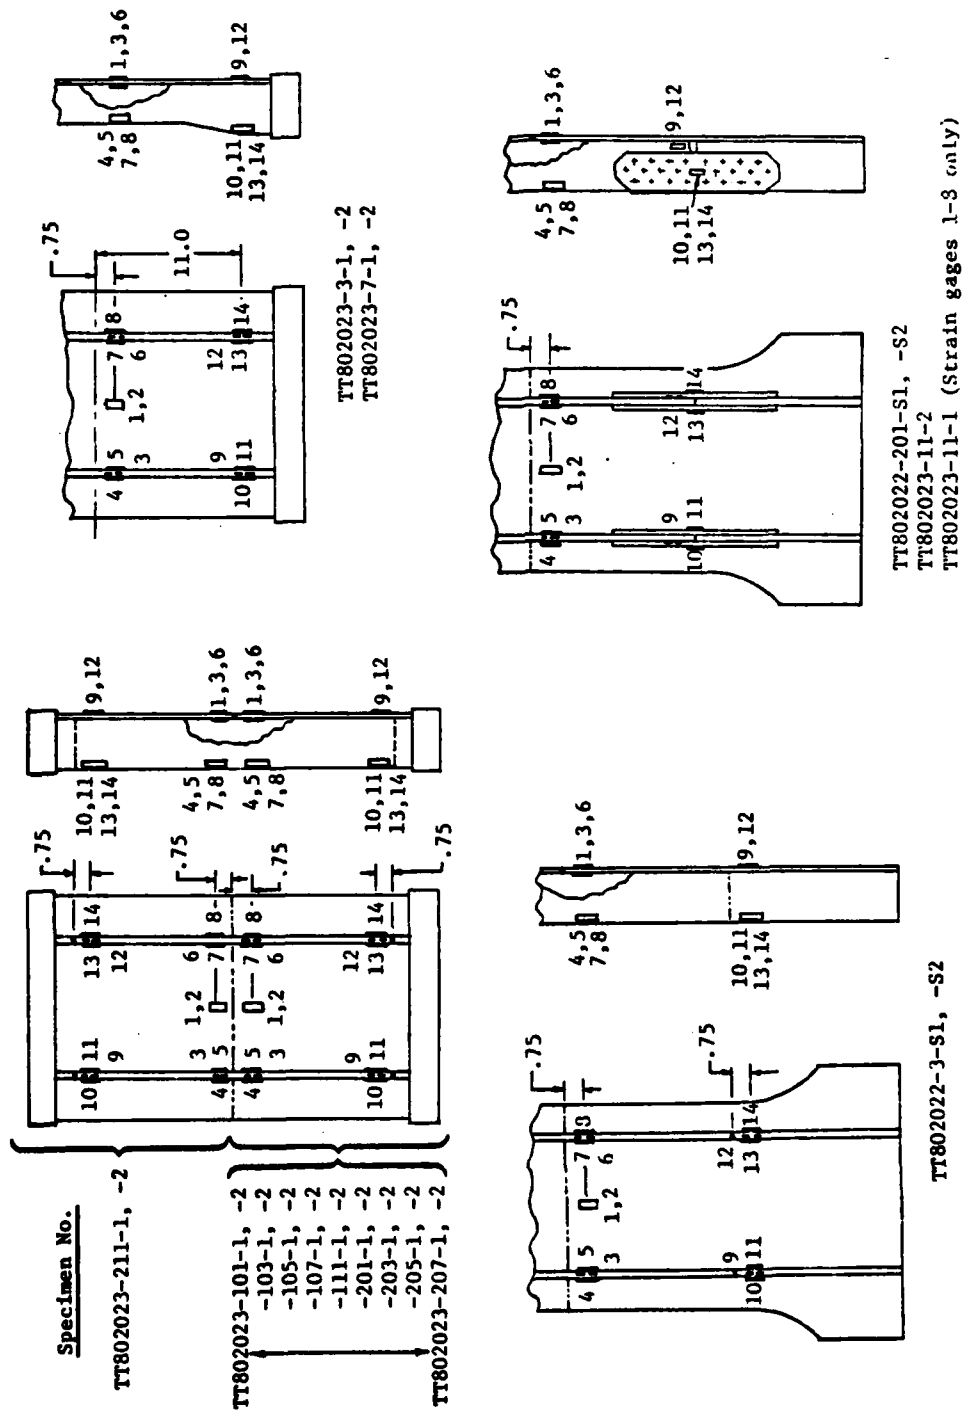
Strain Gage Identification, Locations and Orientations on Stiffened Panel Static Tension and Compression Test Specimens.
